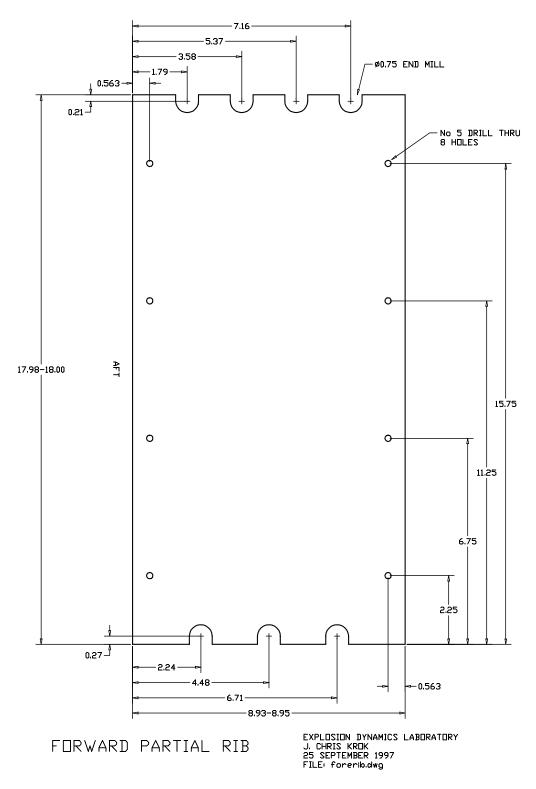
Forward partial rib hole layout for 1/4-scale facility.
